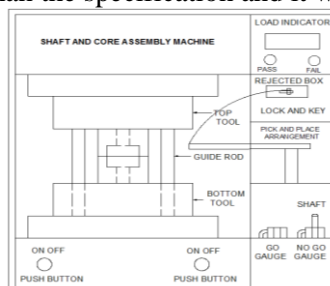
Shaft and Core Assembly machine interface with load cell and indicator
